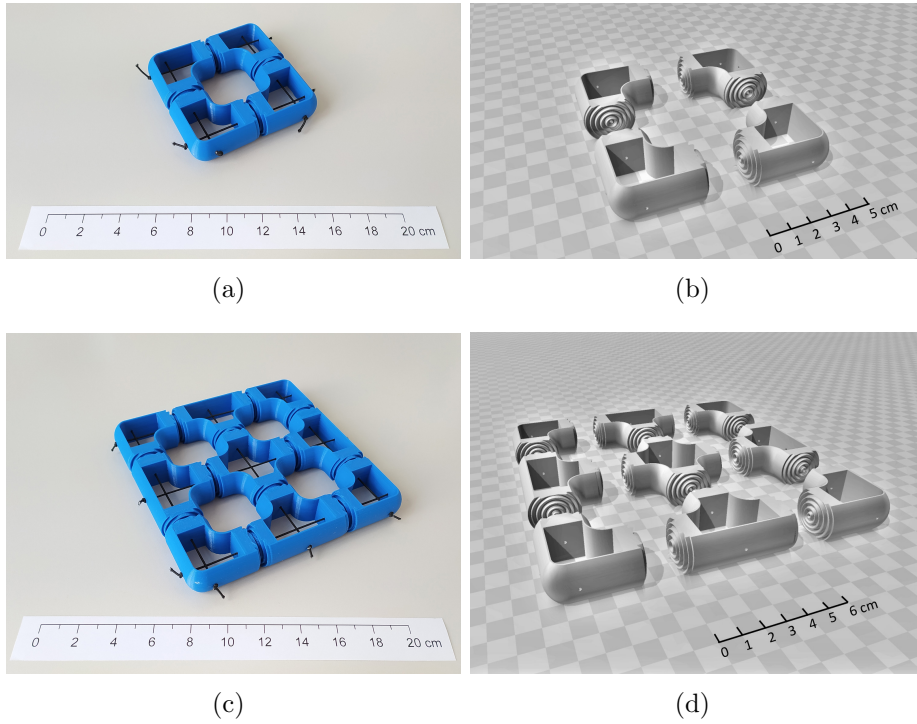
Segmental plates with [flextegrity](#) skeleton. (a) Photograph of the manufactured basic unit composed of 4 segments, and (b) corresponding exploded view. (c) Photograph of a larger plate with 9 segments (4 basic units) and (d) corresponding exploded view. Tendons are black-colored elastic strings.
